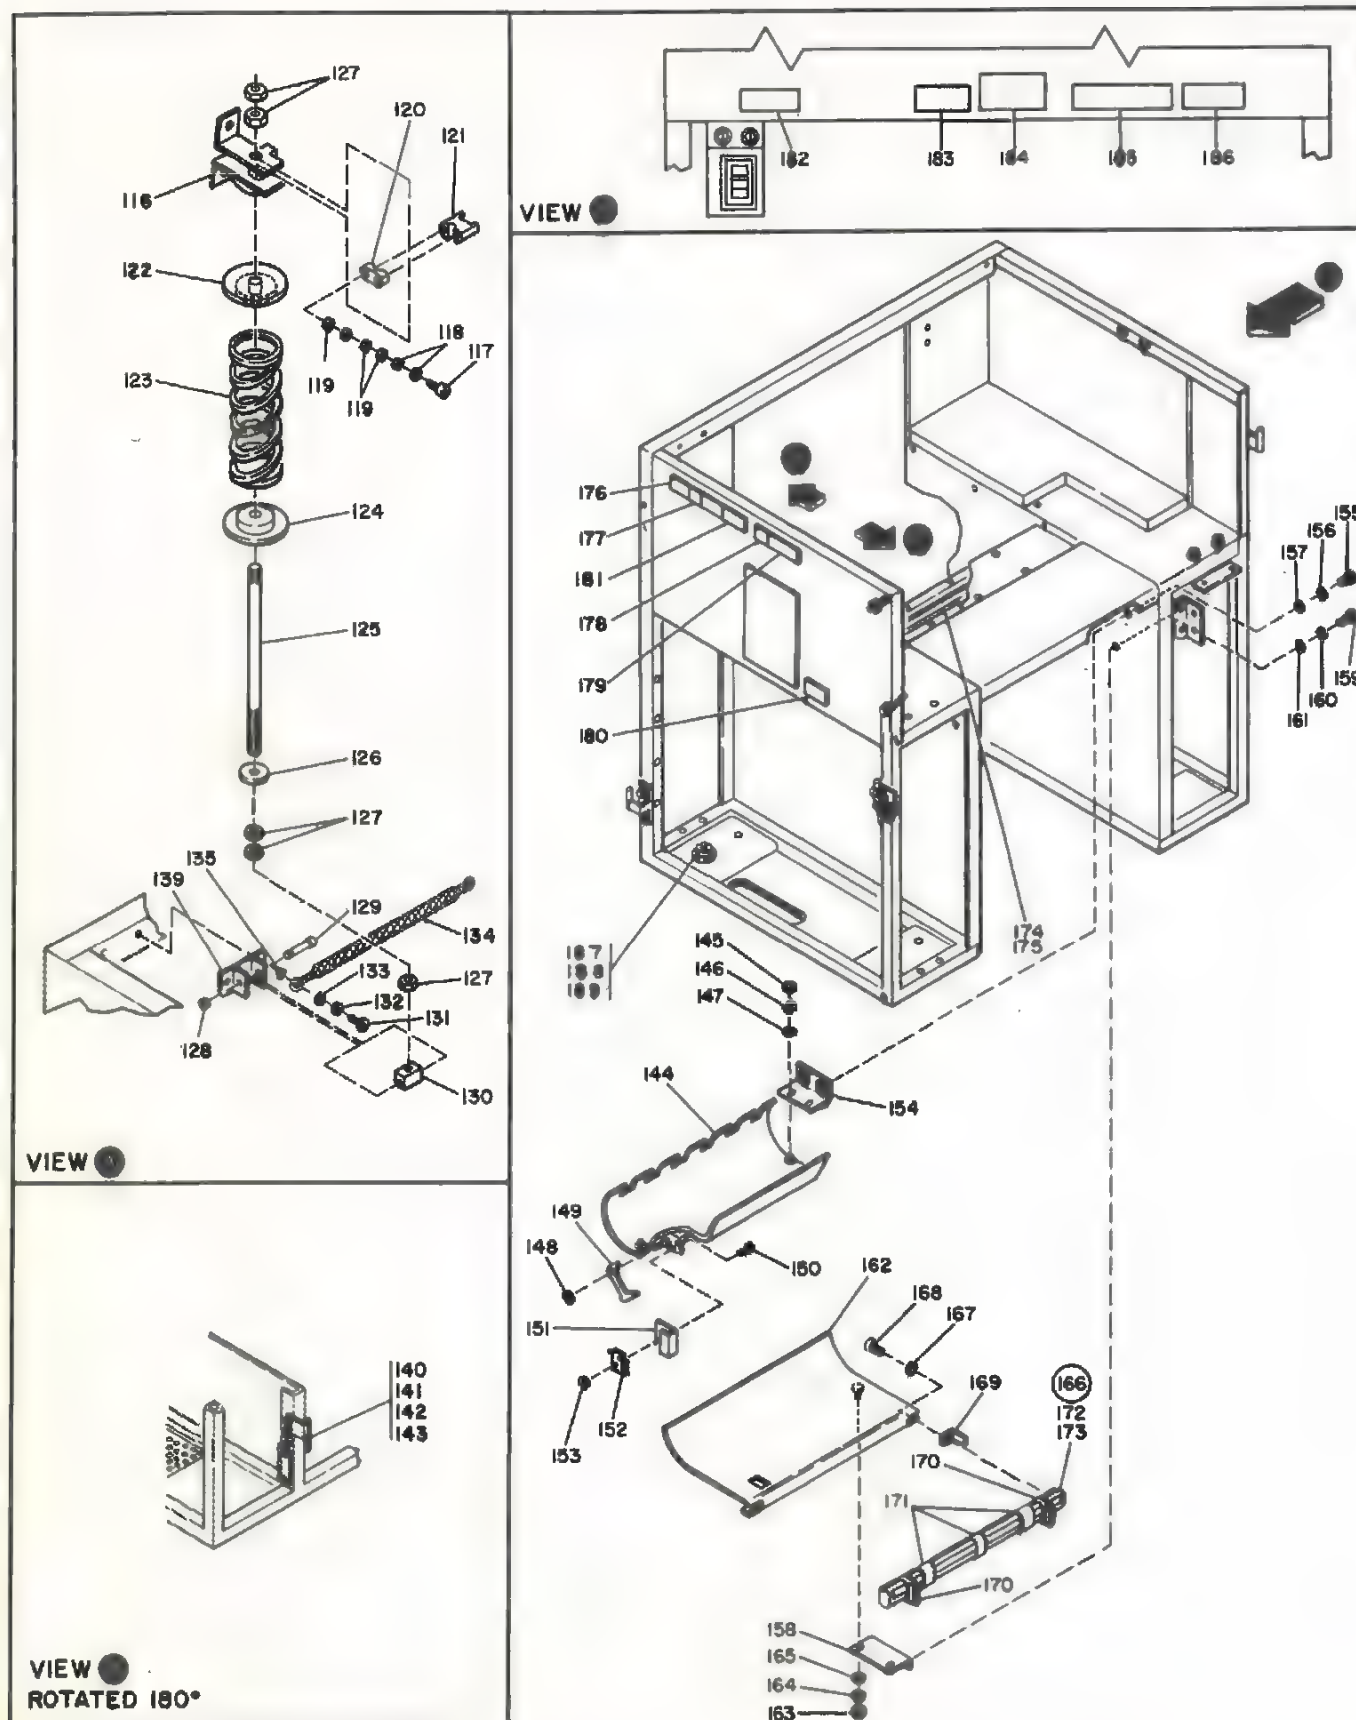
LOWER STRUCTURE ASSEMBLY. SHEET 2 OF 2. INDEX NOS. 116-189. SEE LIST 2.
